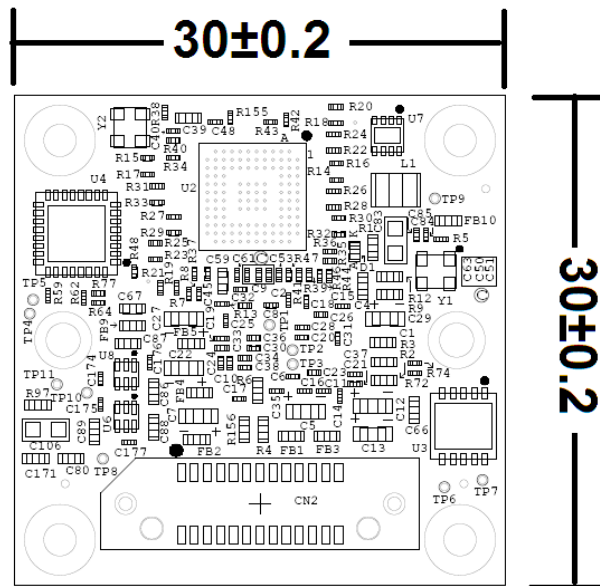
Rear View of e-CAM24_CUNX Module Board Mechanical Dimensions
